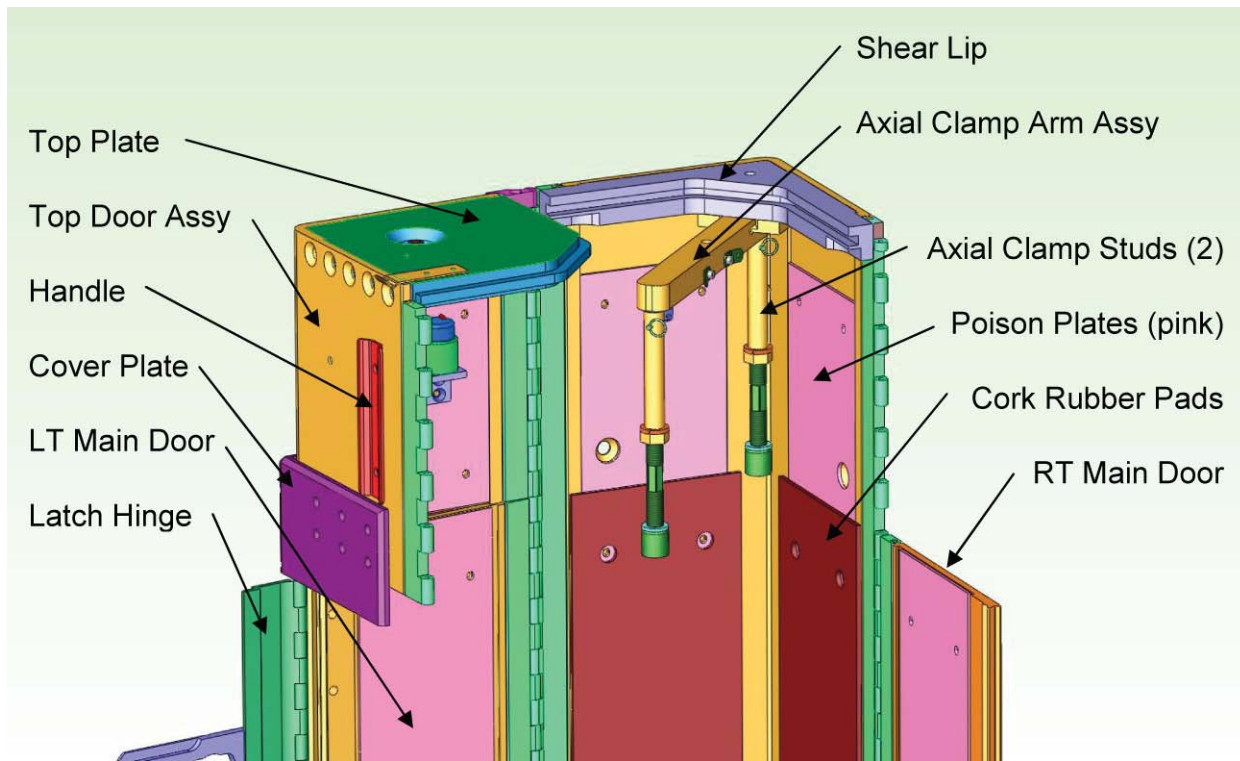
Clamshell with Fixed Top Plate (FTP)
